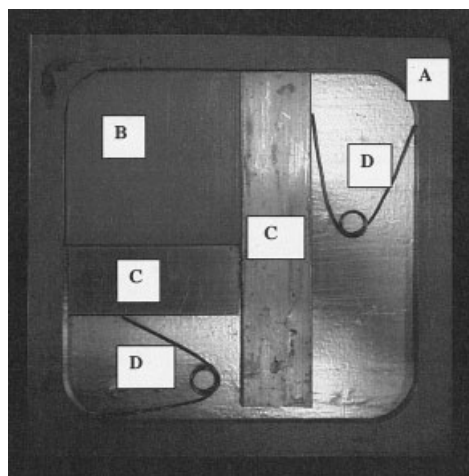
Polymer/polymer welding setup: mold (A); polymer to be welded (B); sliding barrier steel inserts (C); springs for pressing inserts against polymer (D).
